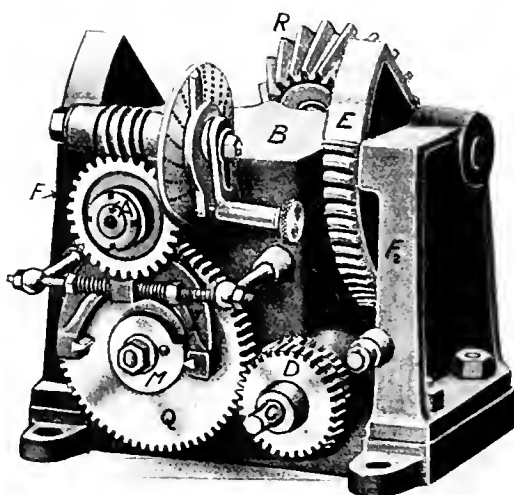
Shaper Attachment devised by Professor Kroll, in which a Circular Templet is used for Forming the Teeth of Bevel Gears.
